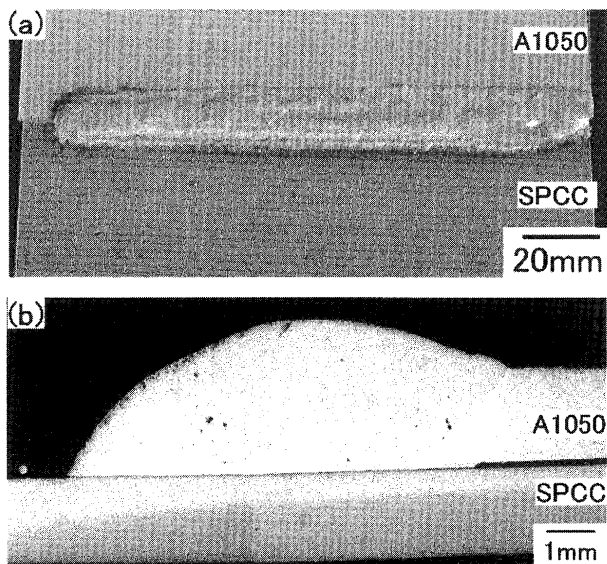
Successful dissimilar metal lap-joint of A1050 Al to SPCC steel sheets by MIG arc brazing using flux cored Al-Si electrode wire; (a) appearance and (b) microstructure in cross section of welds¹¹⁾.
